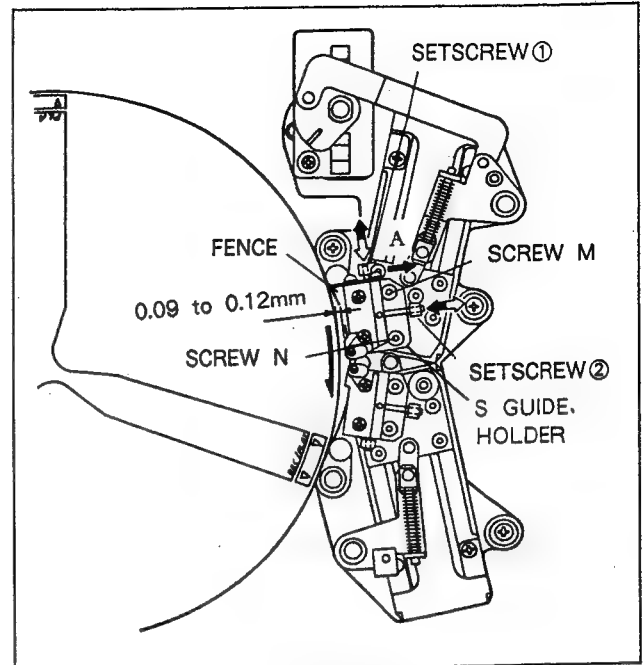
Entrance Slant Guide/Upper Drum Clearance Adjustment
